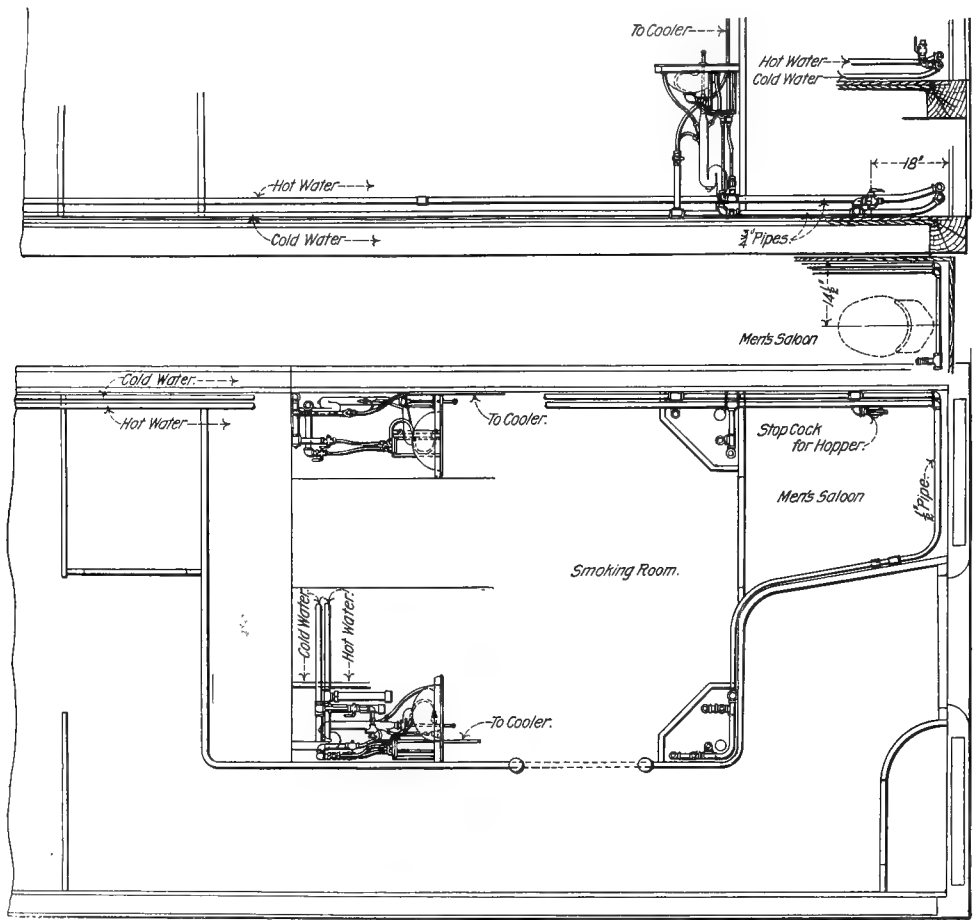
Plan of Piping for Men's Wash Room in Pullman Drawing Room Sleeping Car.
